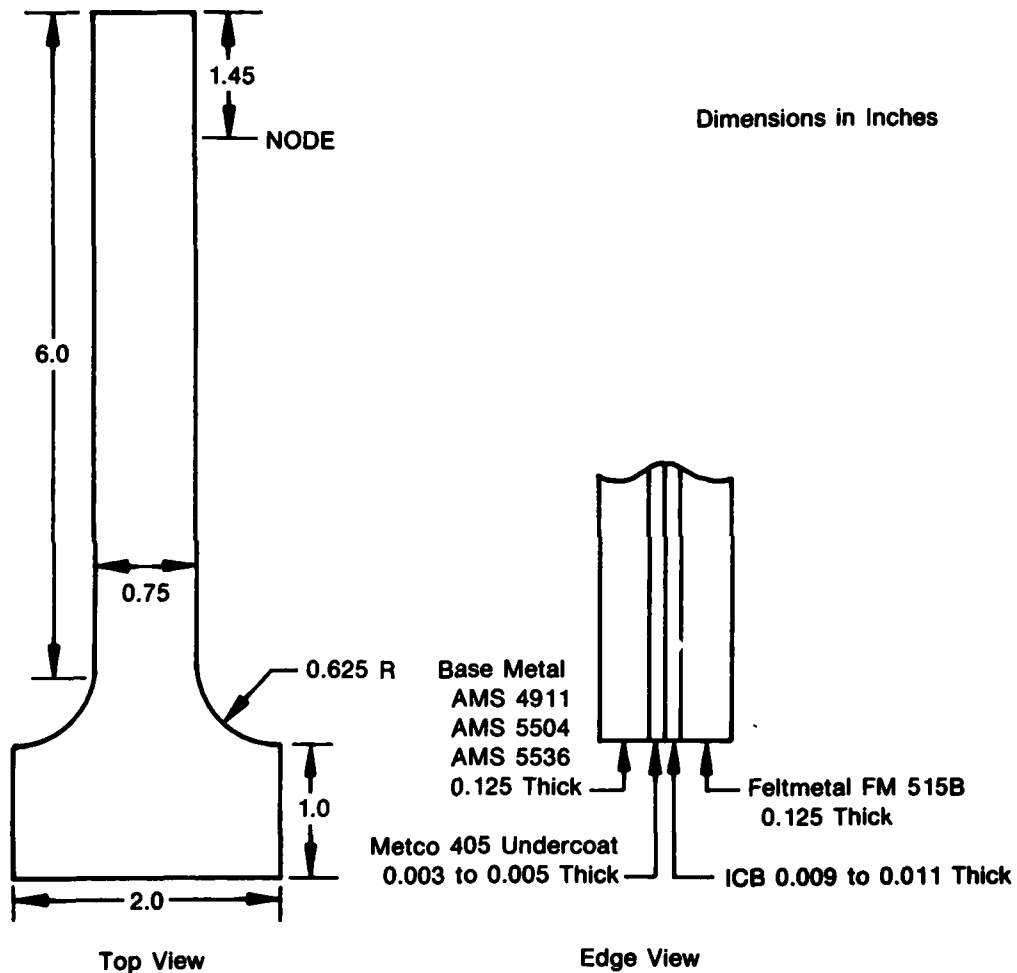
Seal Attachment Tensile Test Assembly Schematic
